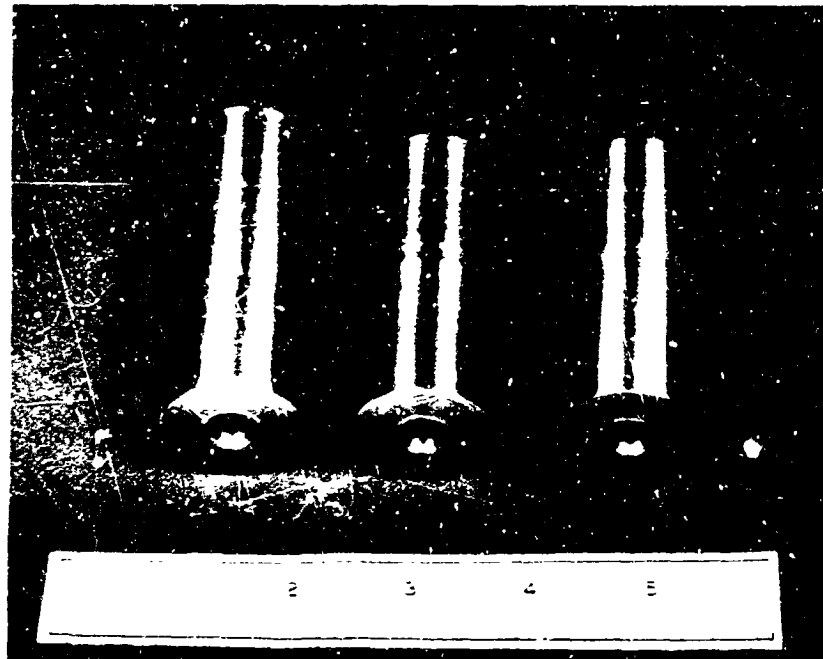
CAST AND EXTRUDED BERYLLIUM--STAINLESS STEEL TARGETS;
